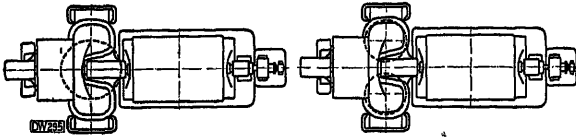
Turbo-alternator. Single-casing steam turbine with one (left) or two (right) exhaust openings
